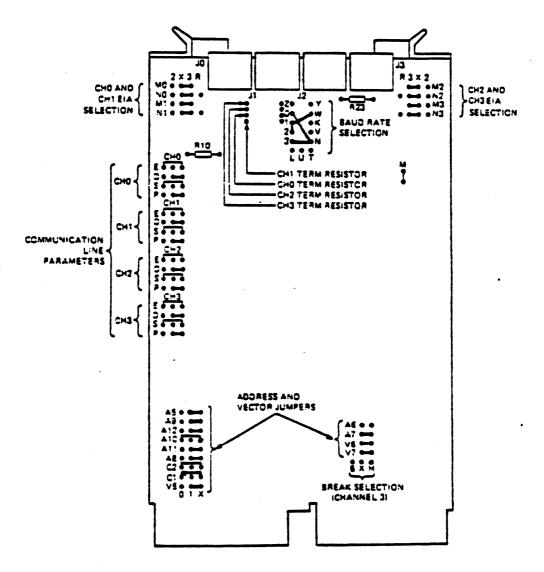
DLV11-J Component and Jumper Factory Configuration Summary
